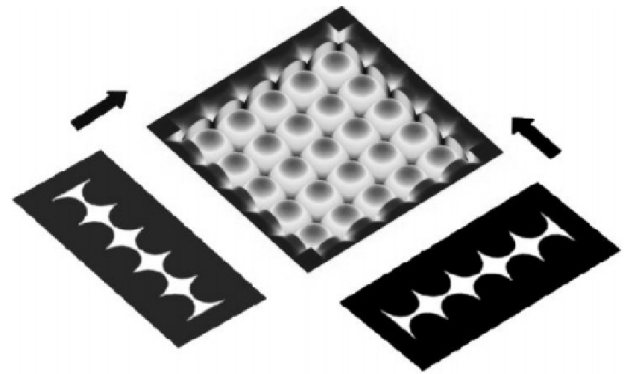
Excimer laser machining with a contour mask and biaxial laser dragging method for fabricating arrayed microlens [11].
